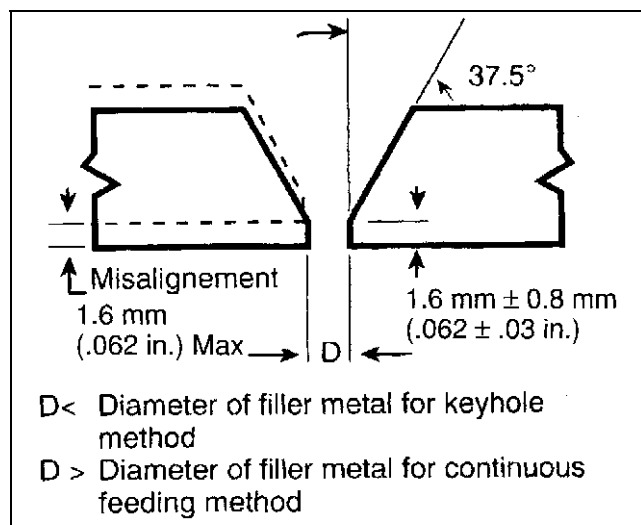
Typical joint design for pipe welded with open root joint and hand-fed filler metal
